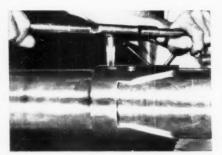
Using mark left by $\frac{5}{8}$ -18 tap, cam is now tapped from outside with $\frac{3}{8}$ pipe thread tap.
